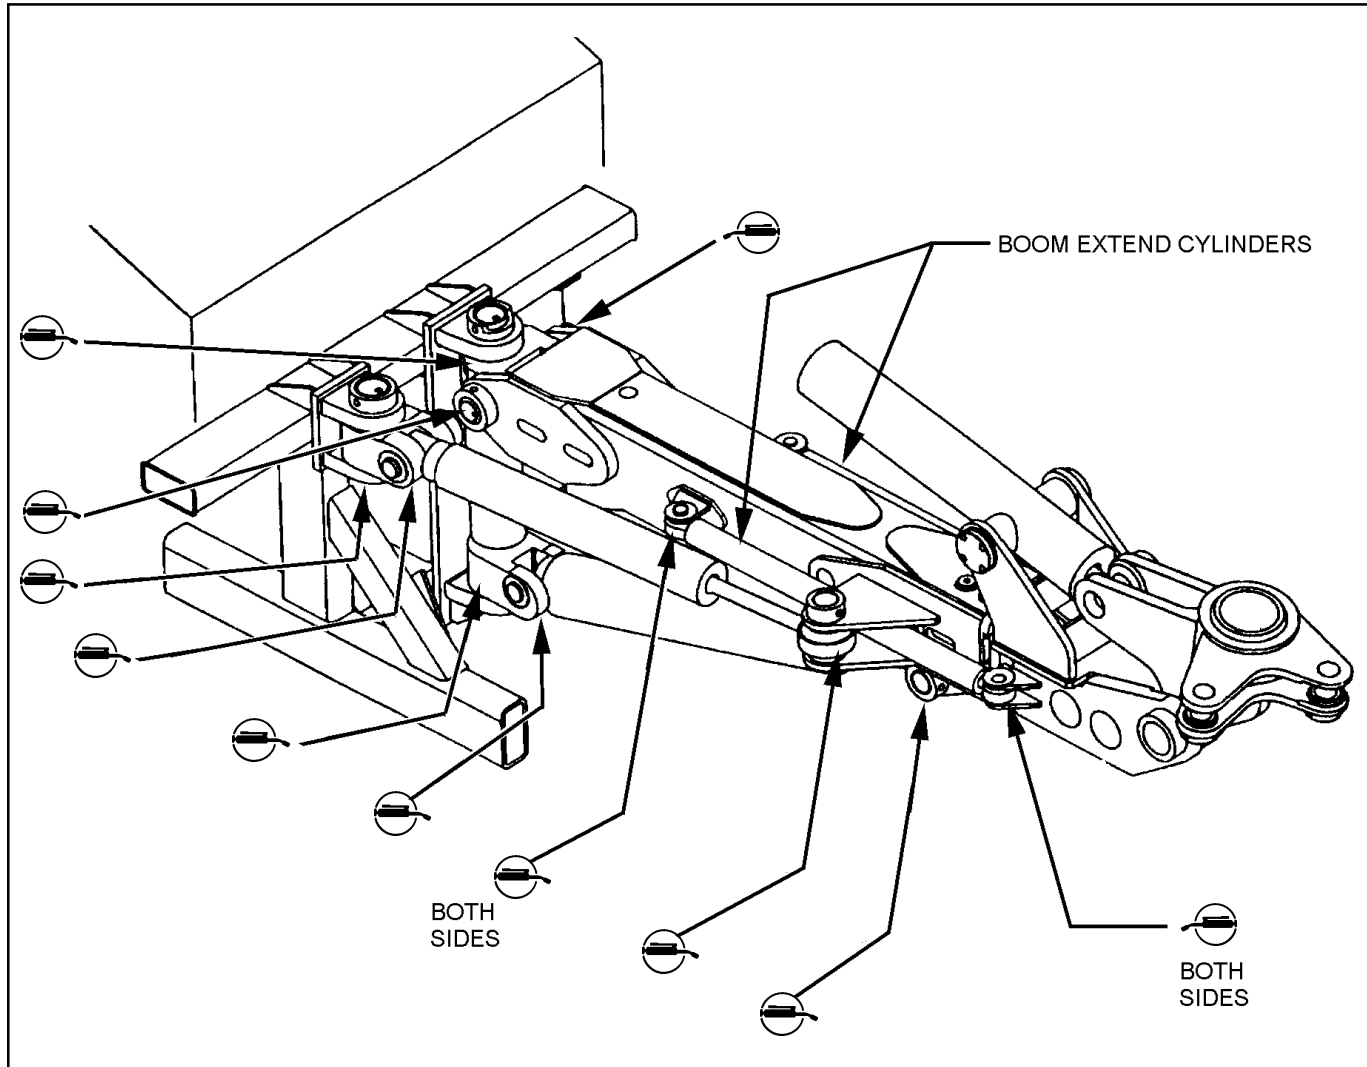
Boom Assembly (extendable shown) - 11 Grease Points
